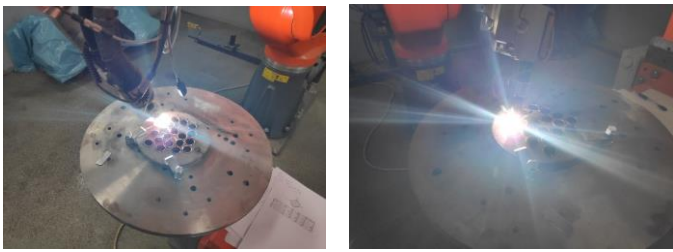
Robotic system welding between the copper pipe and the heat exchanger test piece, performed after the cold testing
